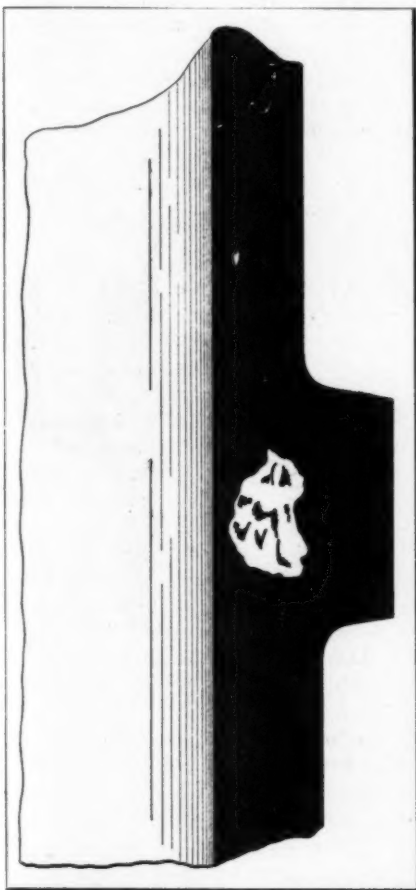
Section at oil-boss indicating shrink hole due to presence of excess metal in boss
